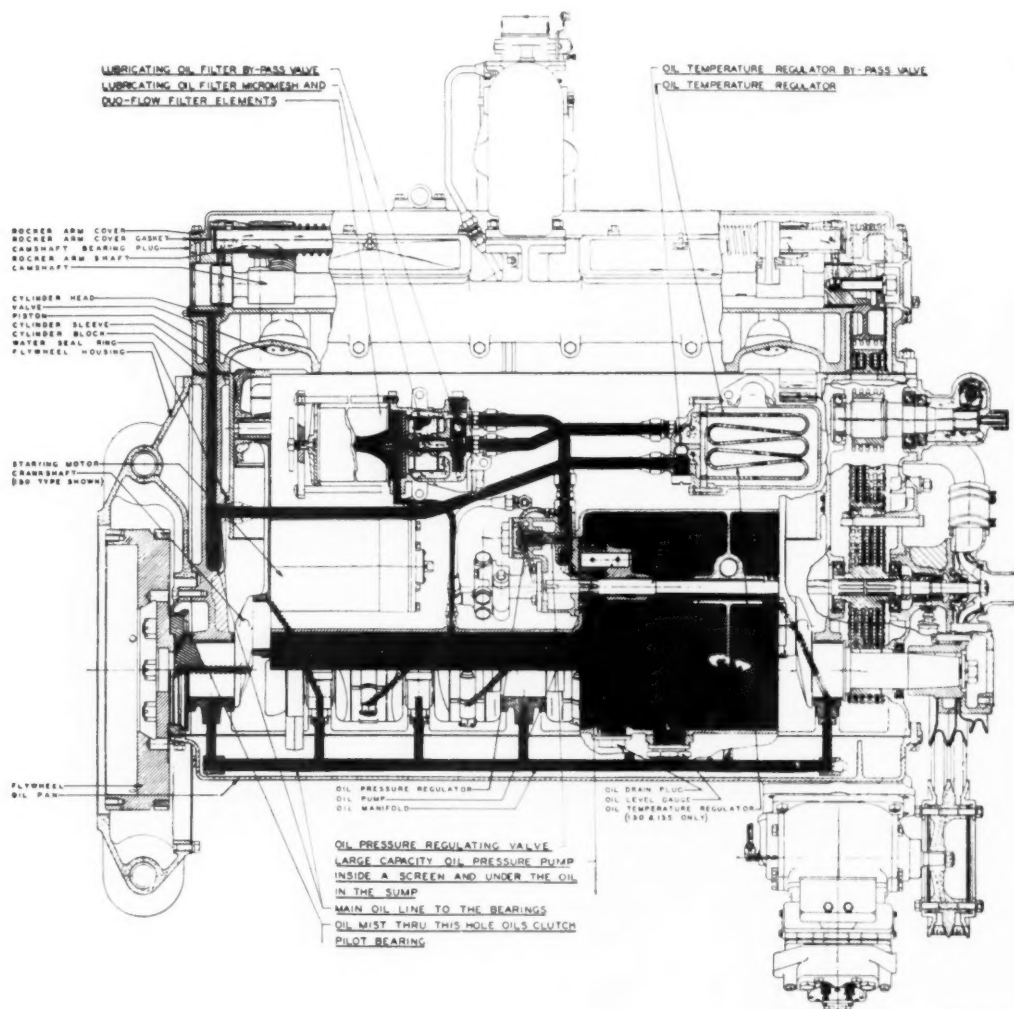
Sectional plan view of Hall-Scott horizontal engine. Note entire lubrication system including sump, oil pump, filter, cooler and high pressure lines to all bearings.
